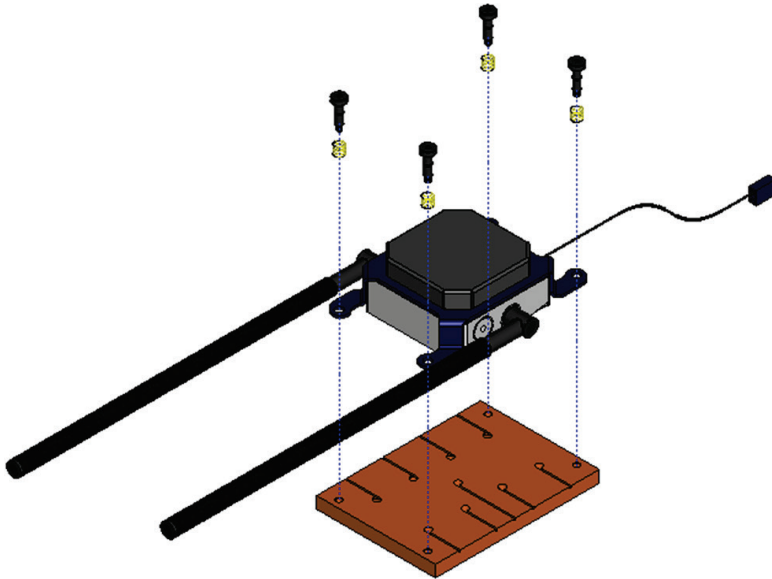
Exploded View of Pump Cold-Plate Unit and Interface Piece for CFP2
